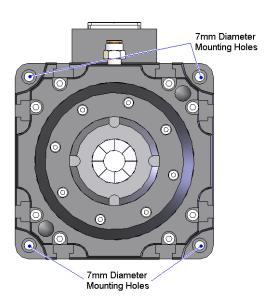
Front view of a Typical ACS-150 Stage Showing End Mounting Holes
